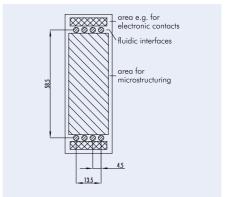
Principle drawing of a microscopy slide with fluidic interfaces – in this version, fluidic interfaces are grouped along the short sides of the chip
